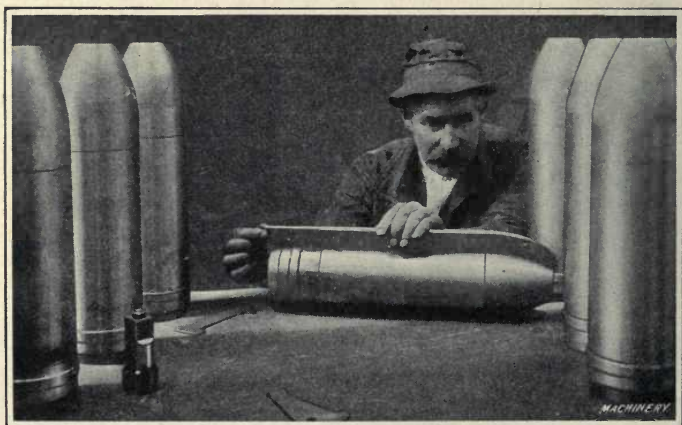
Gaging Contour of French 120-millimeter High-explosive Shell
